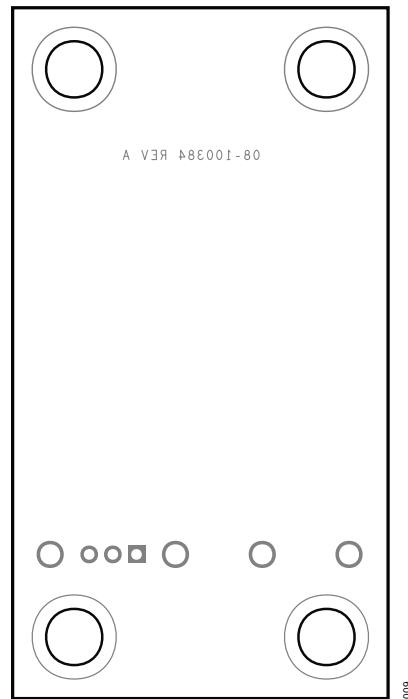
EVAL-ADPL21610-AZ Component Placement Guide—
